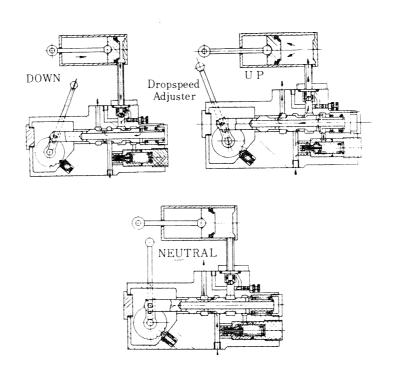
Structure and function of hydraulic control valve 4-2 Disassembly and assembly
